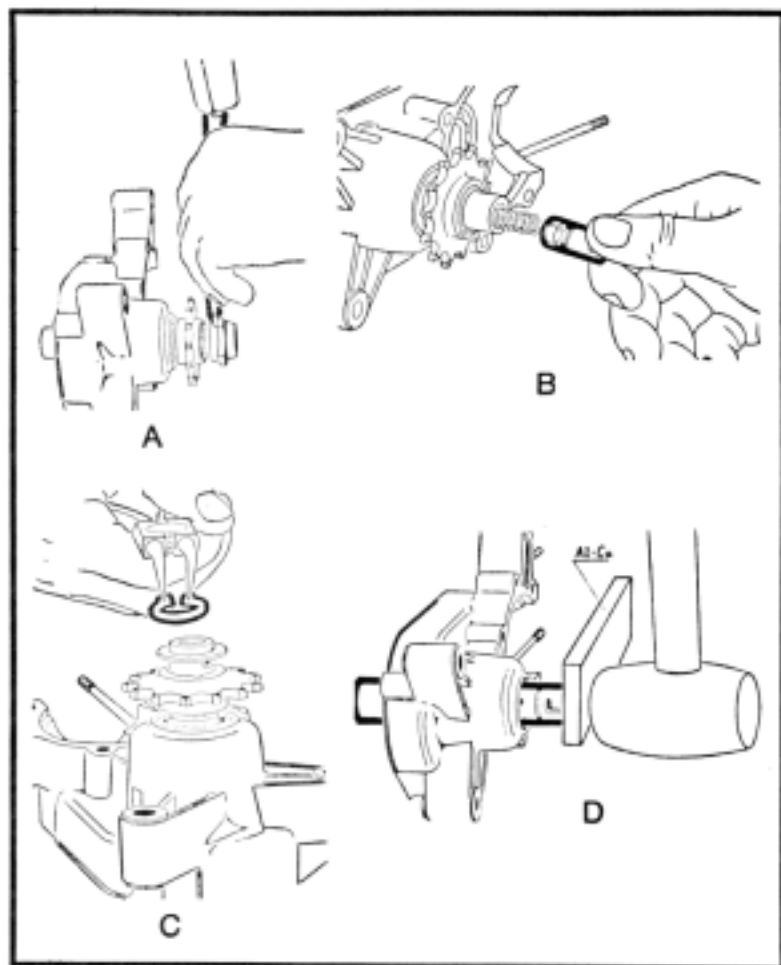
Jawa lockout service. Drive out the control gear pin (view A); extract the plunger (view B); remove the spring clip and sprocket (view C); and tap the countershaft out of the casting (view D). It may be necessary to heat the casting with a propane torch to release the bearing. This technique was described in the previous chapter.
